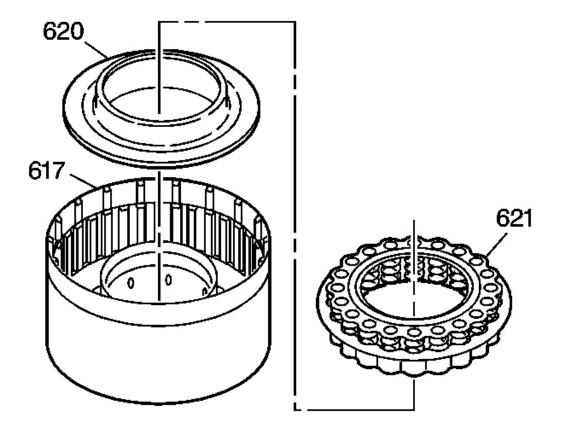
Identifying Second Clutch Spring Assembly Courtesy of GENERAL MOTORS CORP.
